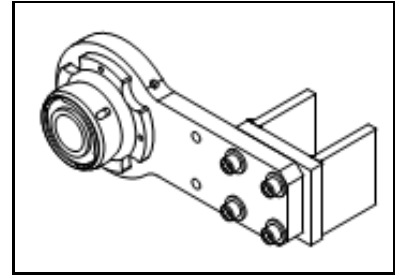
SINGLE-ARM SPHERICAL BEARING MOUNT
